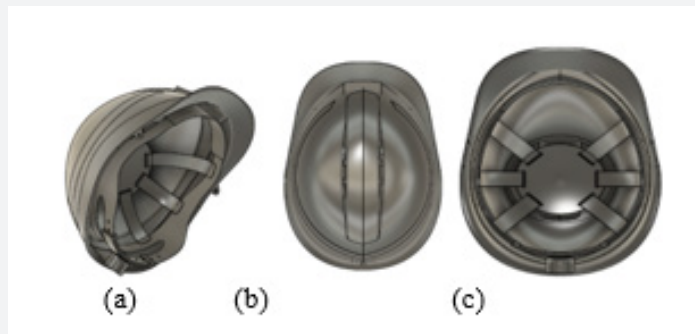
Proposed helmet design (a) Isometric view (b) Top view (c) Bottom view.
